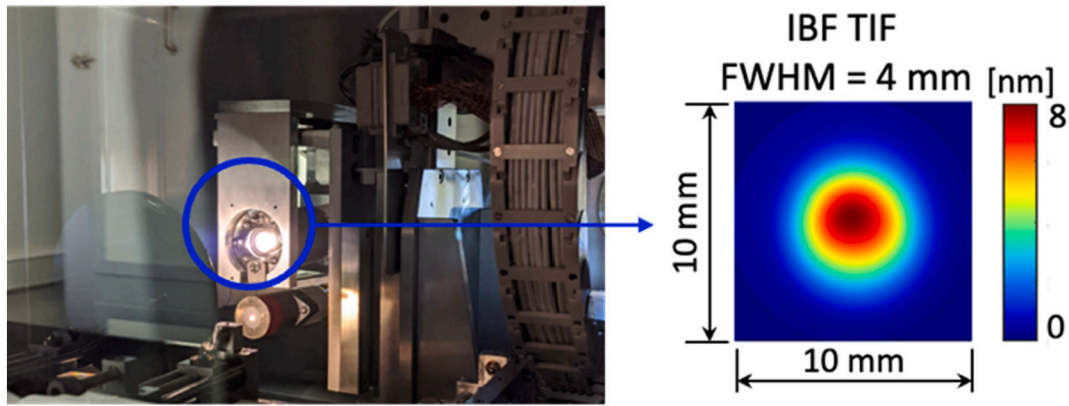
The IBF machine tool is extracted as a Gaussian-shape TIF.
